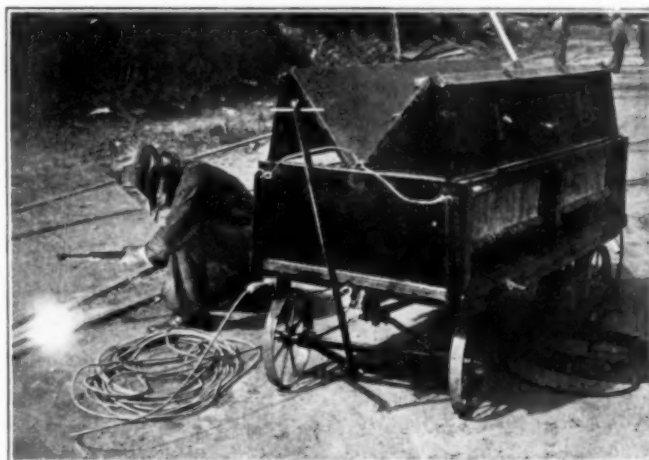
550-VOLT RAILWAY ARC-WELDING SET
